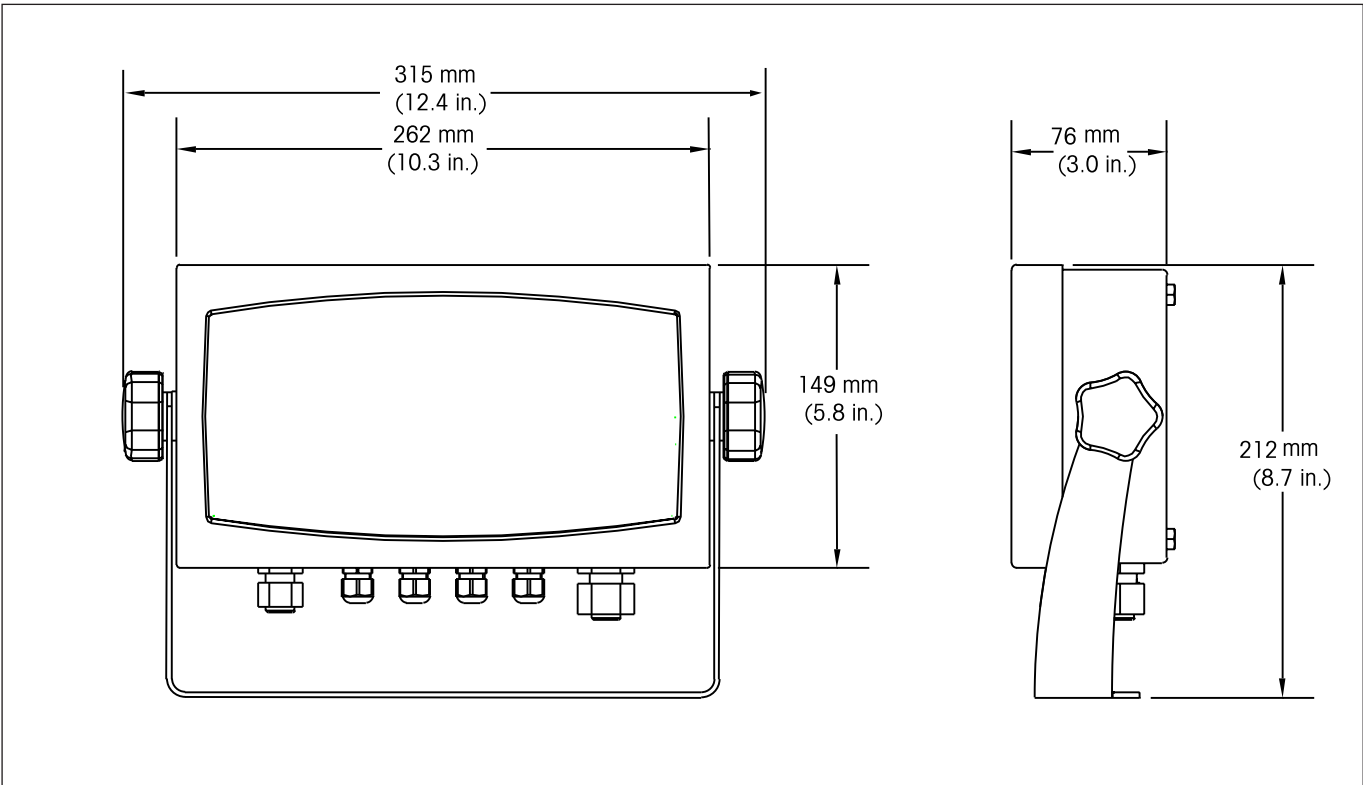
T51XW Indicator Overall Dimensions with Mounting Bracket.
